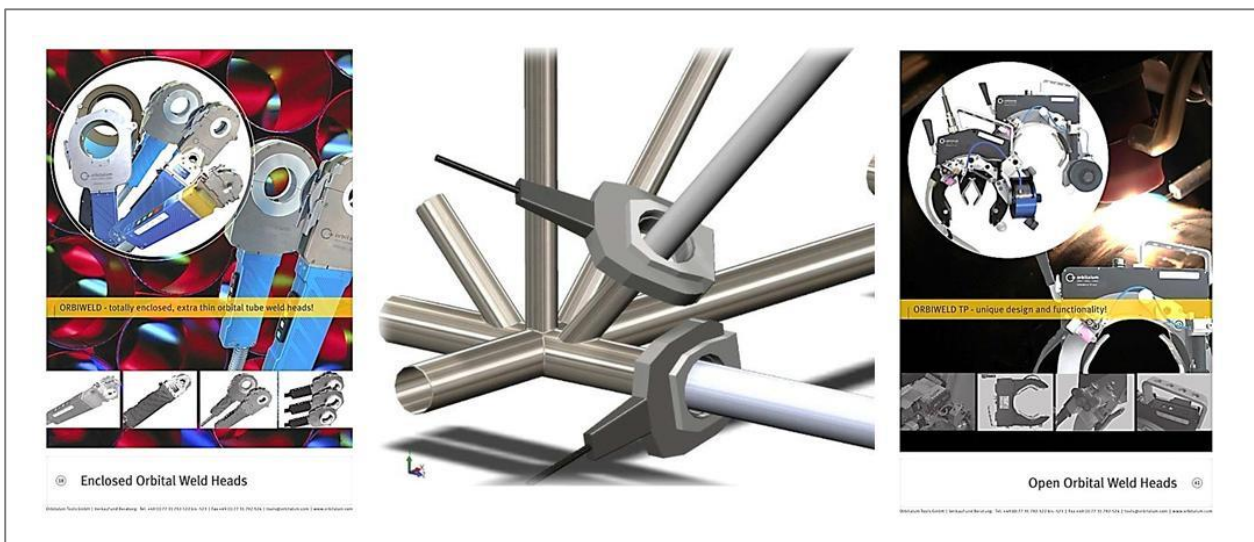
Details of Automatic Orbital Welding Equipment. Courtesy Technodyne Ltd + Rhyal Eng. Ltd.
